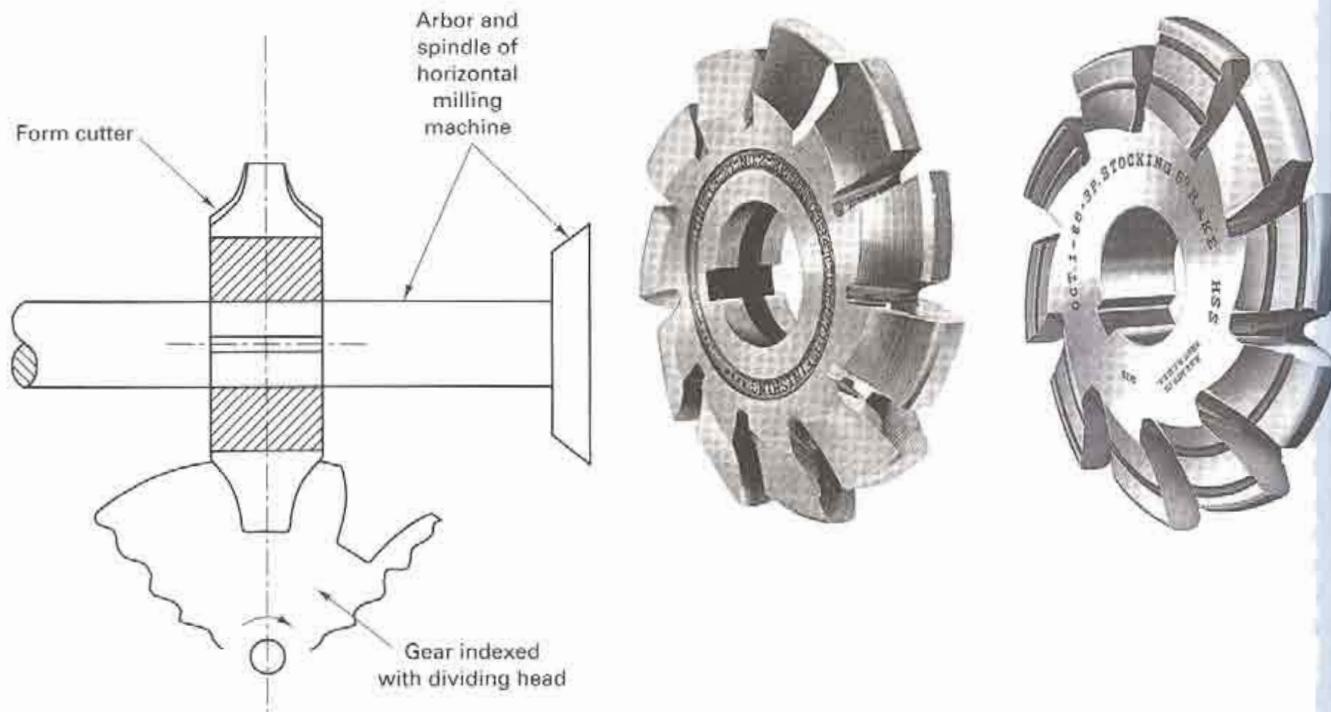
The basic method of machining a gear using a form cutter (left) to mill out the space between the teeth using the form cutter (middle) or the stocking cutter (right) to machine the gear. (Courtesy of Brown and Sharpe Manufacturing Company.)
